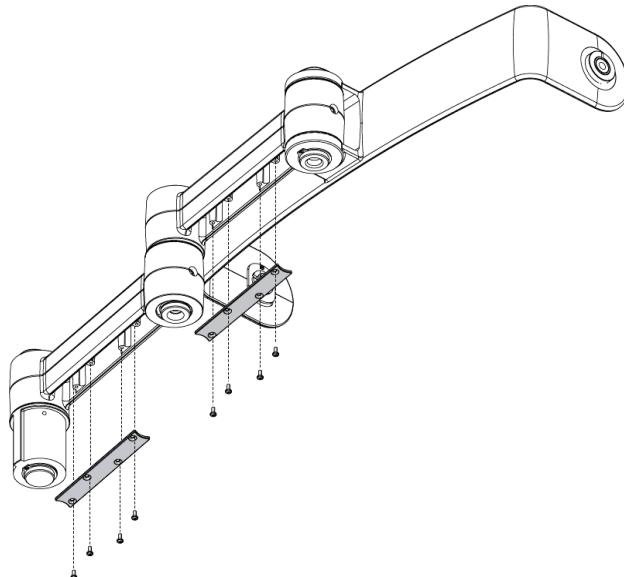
Temporarily removing cable retainers from tracks under double articulating arm sections
